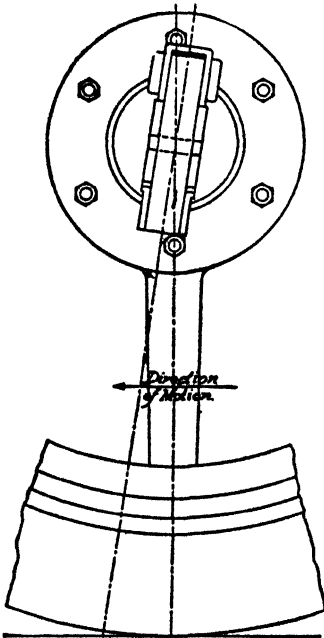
DIAGRAM ILLUSTRATING WHEEL CASTER.
